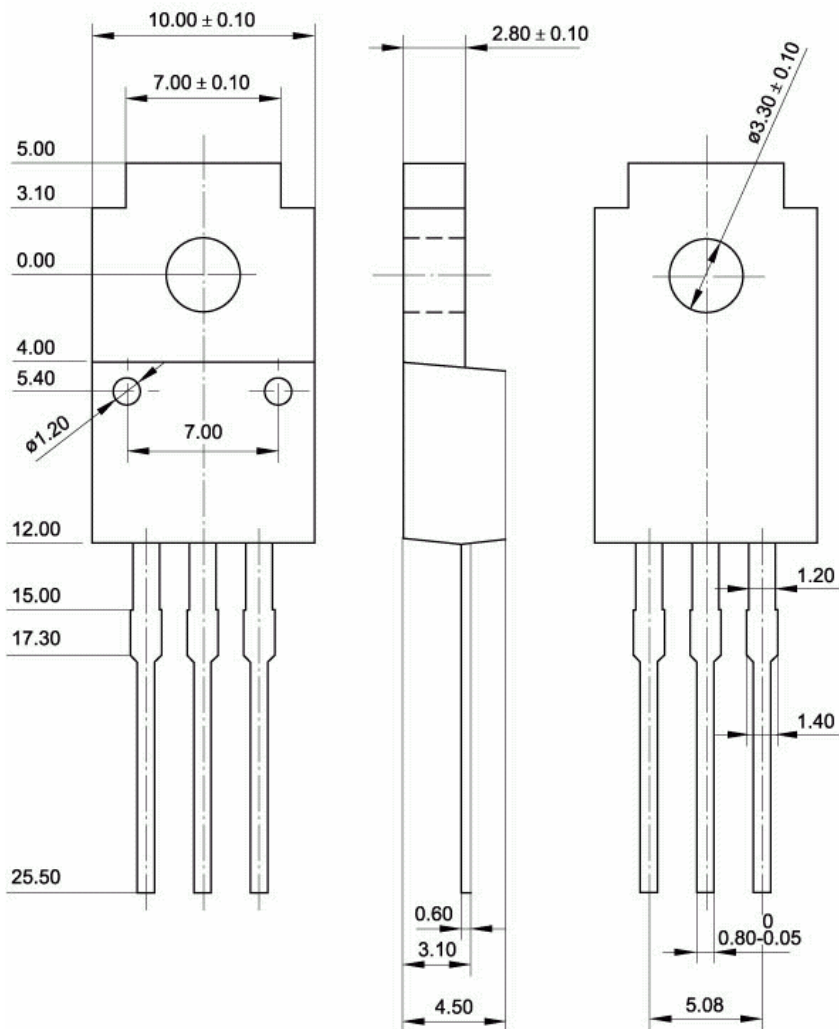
Outline dimensions (unindicated tolerance: ± 0.15 mm)
